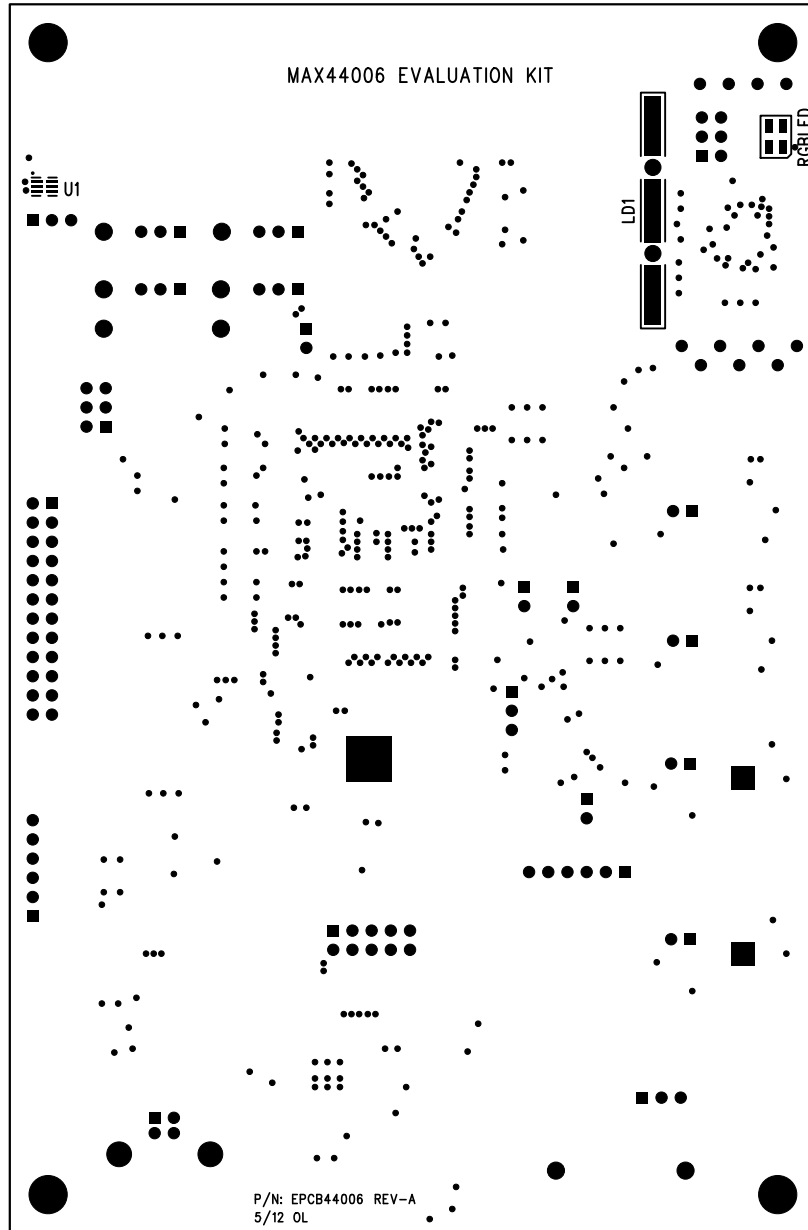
MAX44006 EV Kit Component Placement Guide—Component Side
